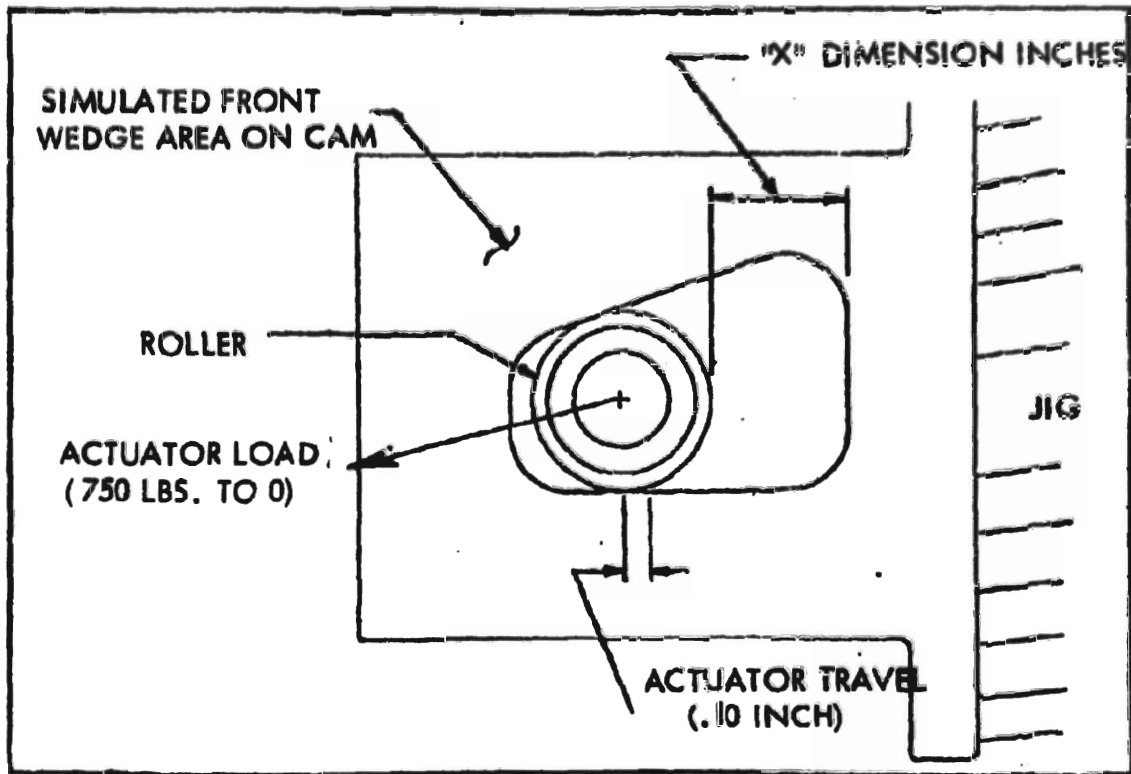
SIMULATED CAM/ROLLER TEST SETUP
